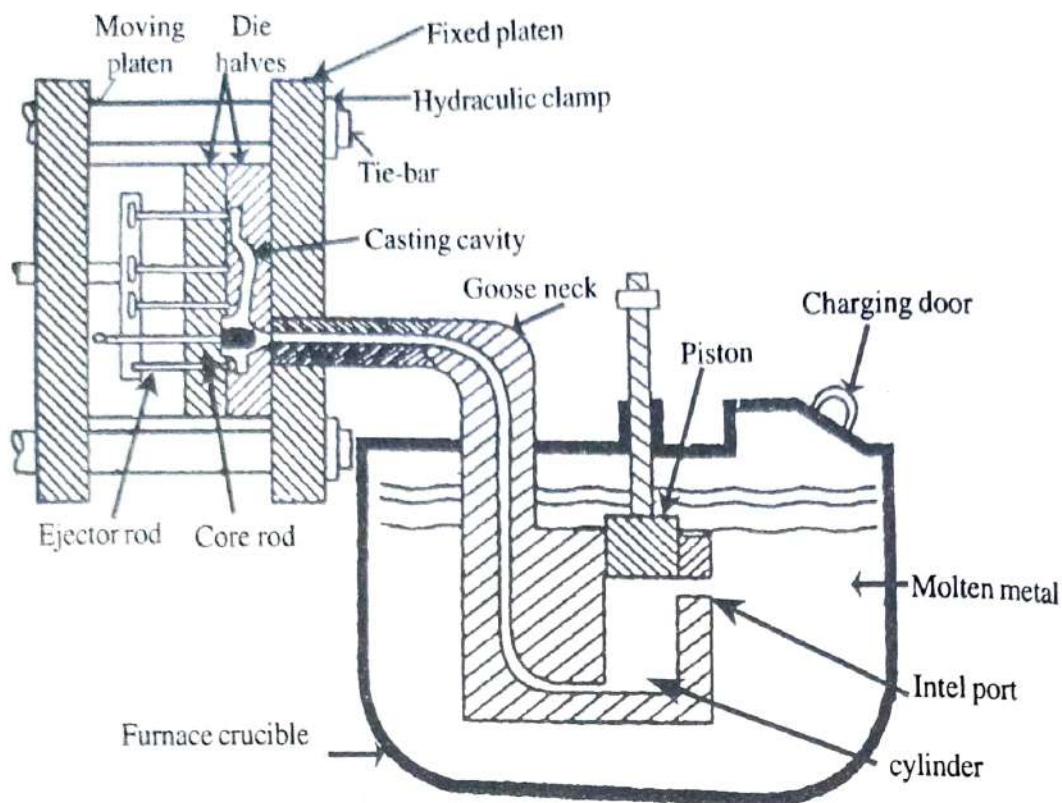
Goose neck Submerged plunger Type Hot Chamber Die Casting Machine.
